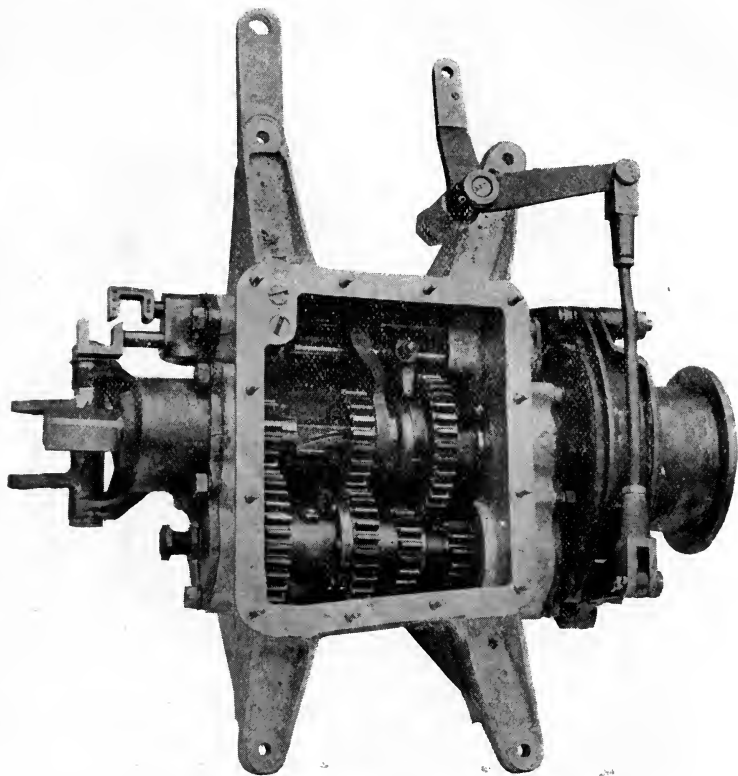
DIRECT DRIVE GEAR BOX, SECOND SPEED POSITION.
